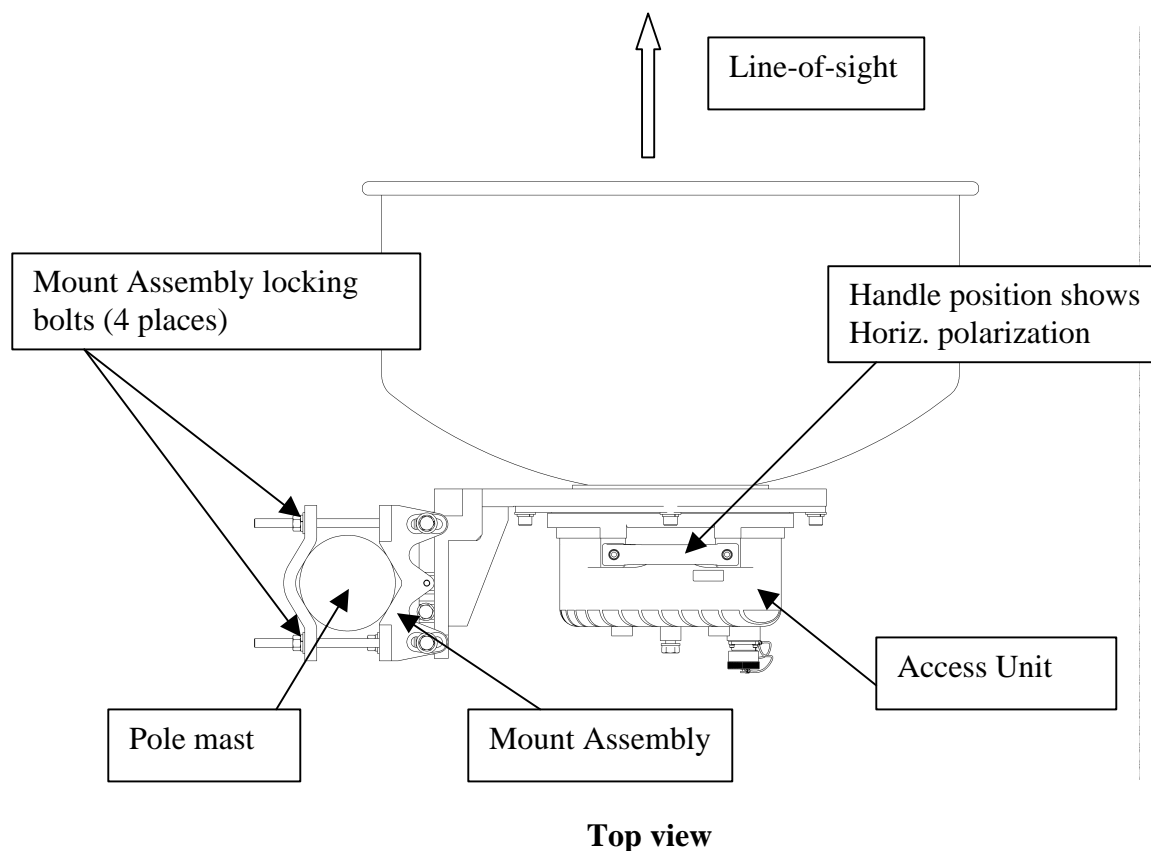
Mount Assembly Orientation to Line-of-Sight for Installation to Right-hand Side of Pole/Mast
